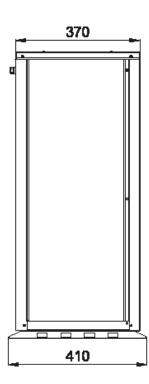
STM 9 and 12 outdoor unit dimensions
